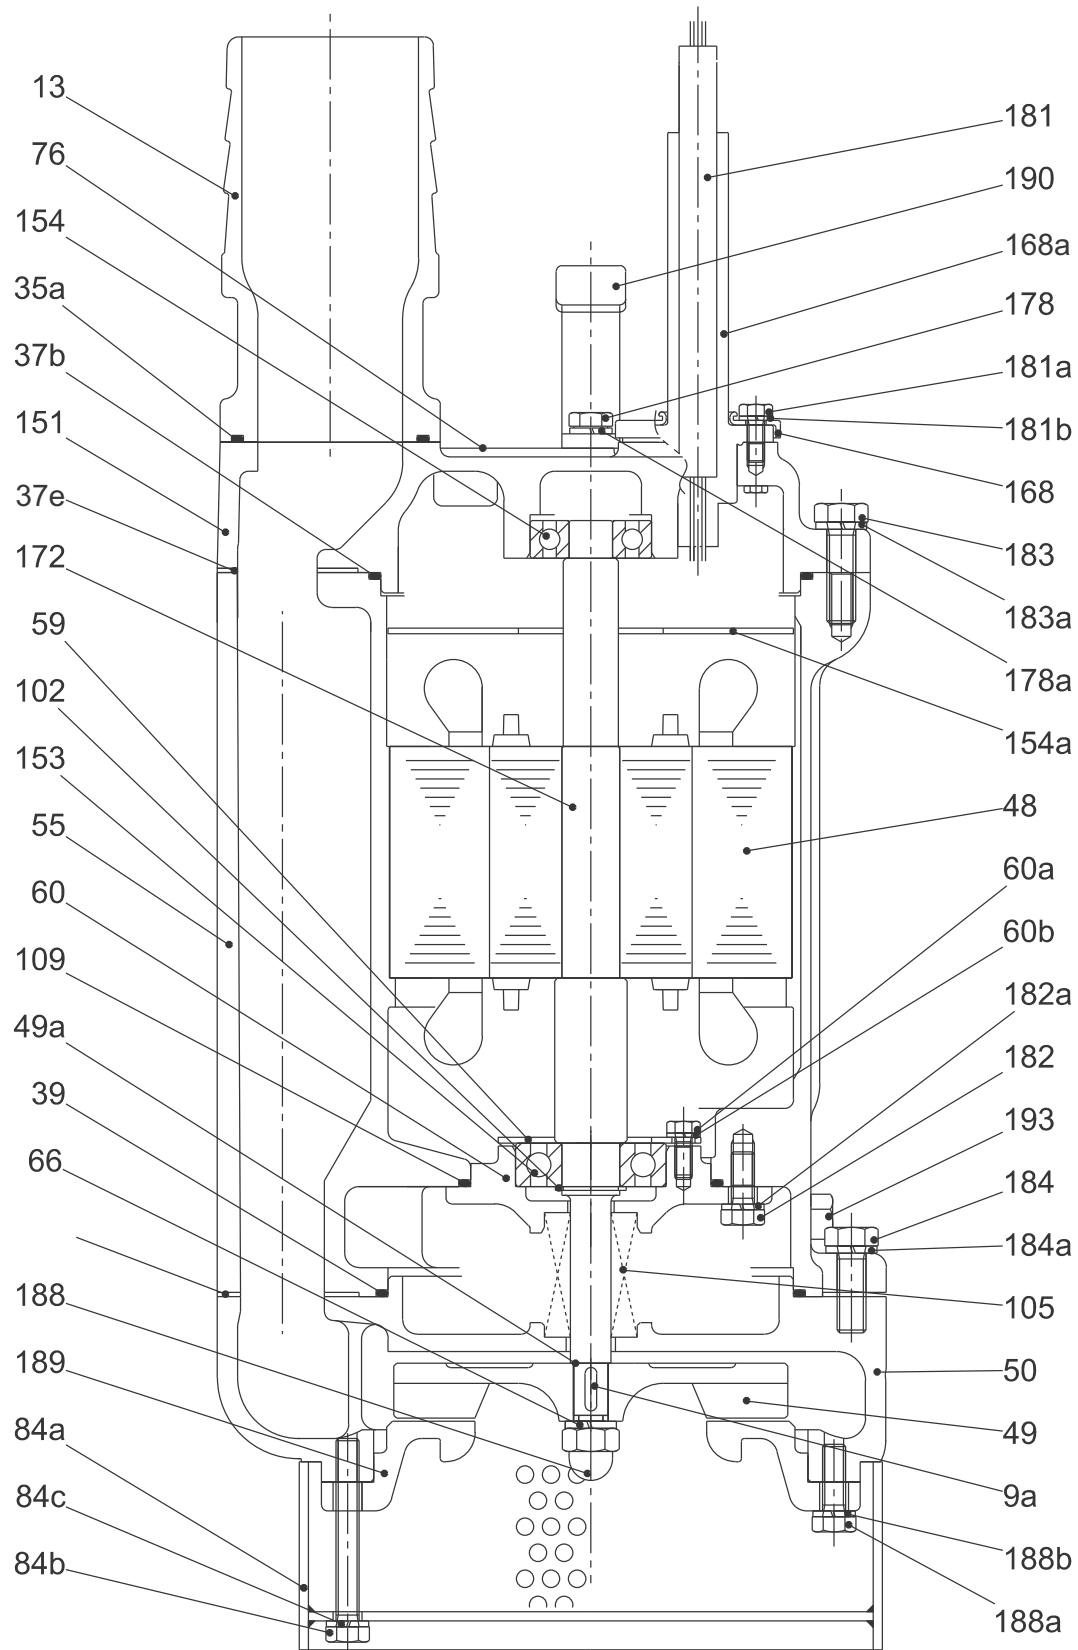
Exploded view DWK.O.6.80.15, DWK.O.6.80.22
